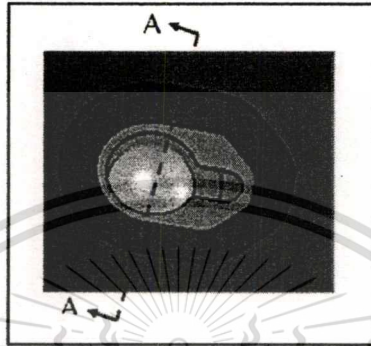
The geometry model of FCB with pre-solder and LT key hole.
